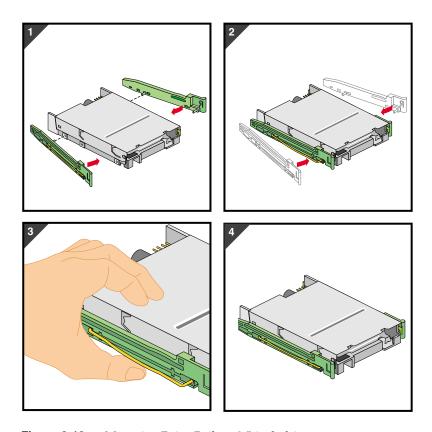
Mounting Drive Rails to 3.5-inch drives
